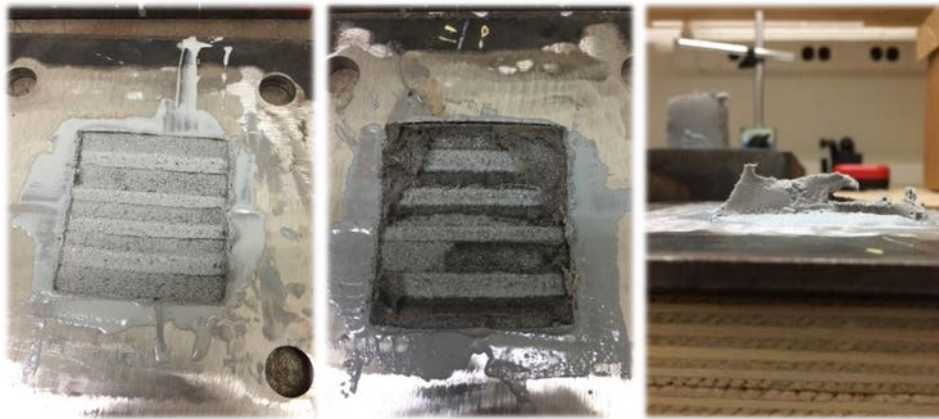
Bond Failure (left); Foam Groove Failure (center); Foam Body Failure (right)
